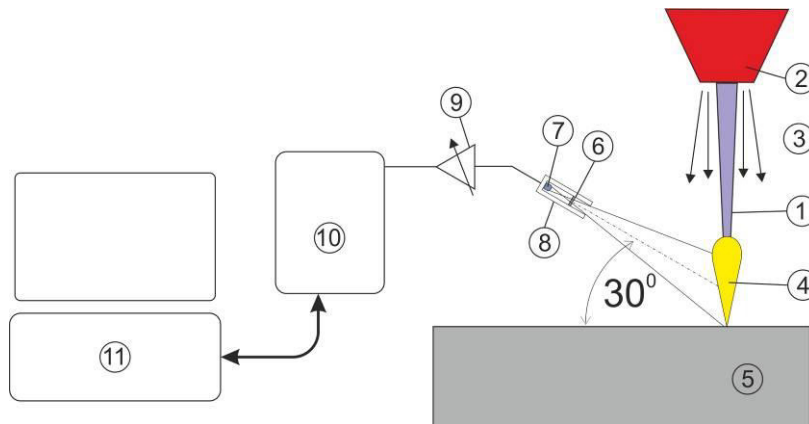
Experimental setup of the laser welding machine: 1 – laser beam, 2 – coaxial nozzle, 3 – shielding gas, 4 – plasma plume, 5 – workpiece, 6 – neutral density absorptive (grey) filter, 7 – photodetector, 8 – photodetector mounting tube, 9 – amplifier with adjustable gain, 10 – data acquisition device, 11 – personal computer with control software.
